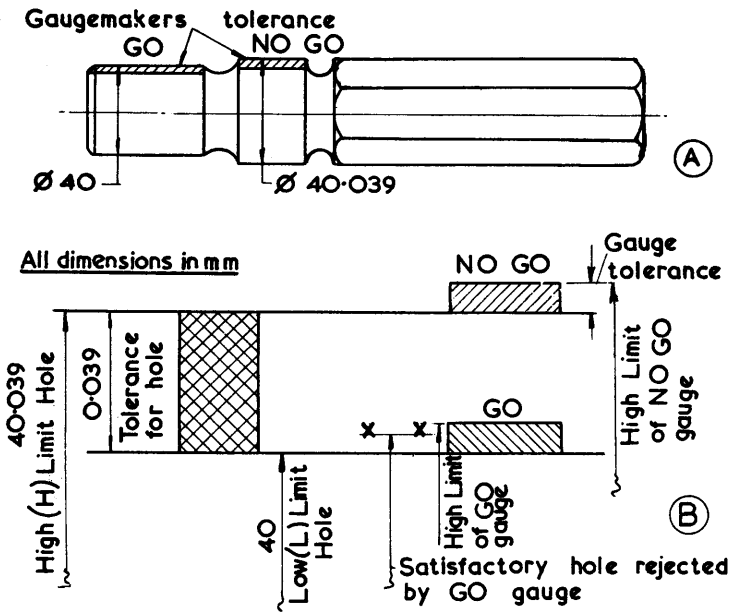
Progressive Plug Gauge Showing Gauge Tolerance.
